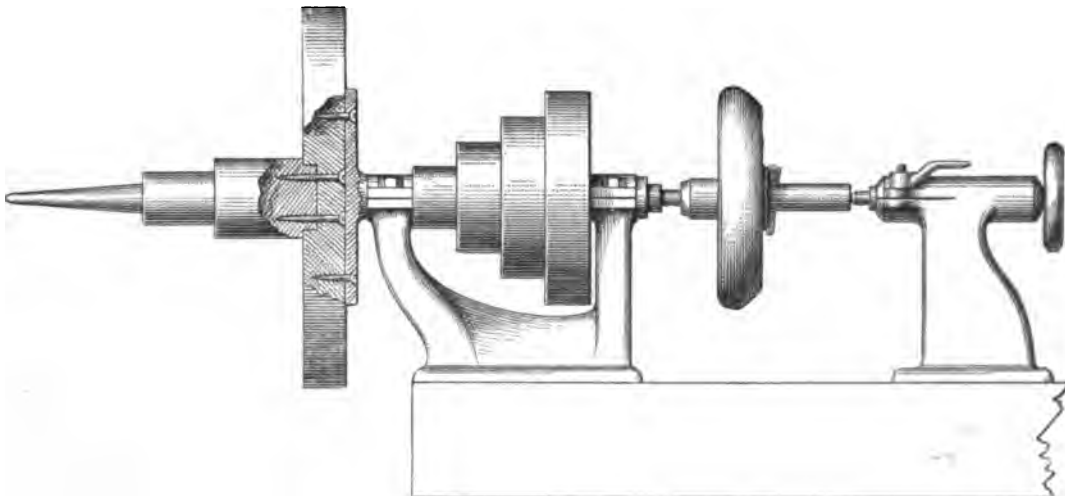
Lathe with Grinding Attachment and Spindle Sander Shown Partially Sectional.
